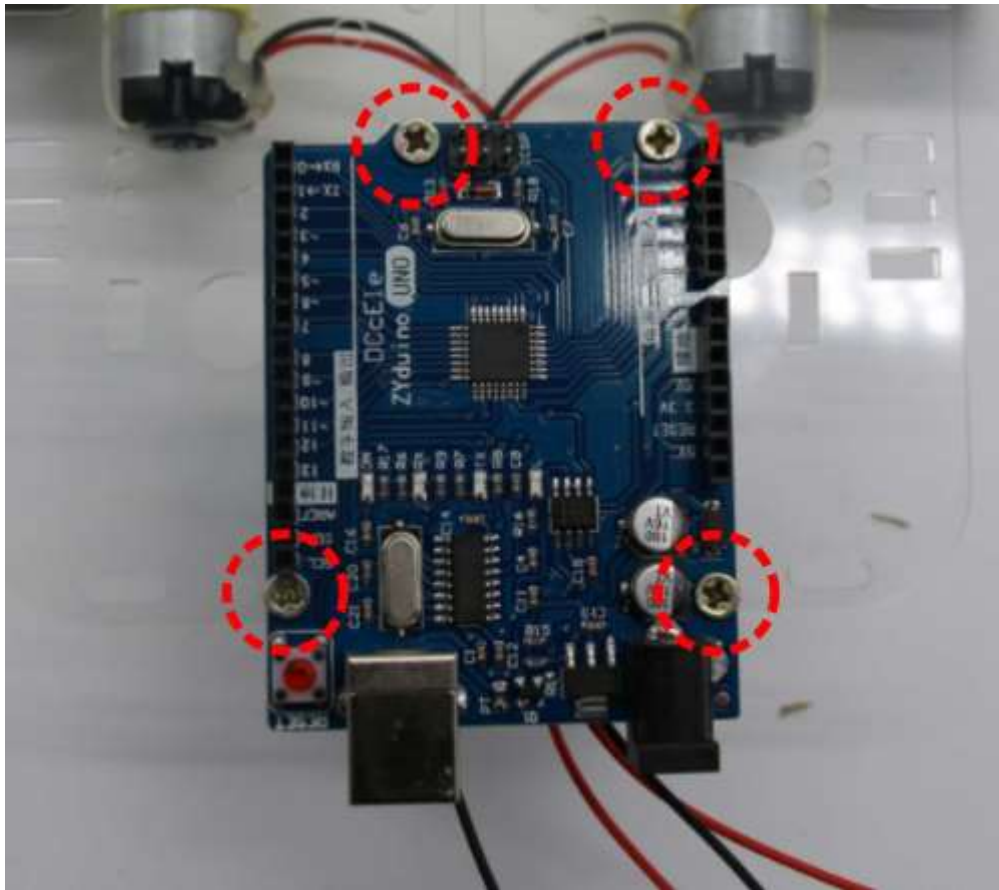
1 : Necessary pieces to install the main control circuit
